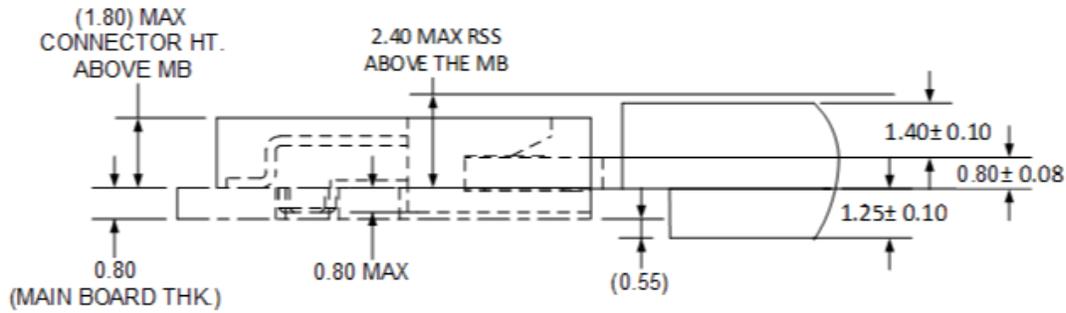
Stack-up Mid-mount (In-line) Double-sided (D3) Add-in Card for 1.5 Maximum Top-side Component Height
